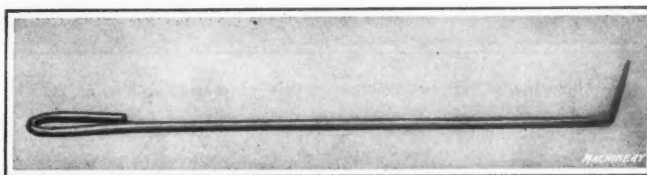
Puddling Rod used when welding Aluminum
